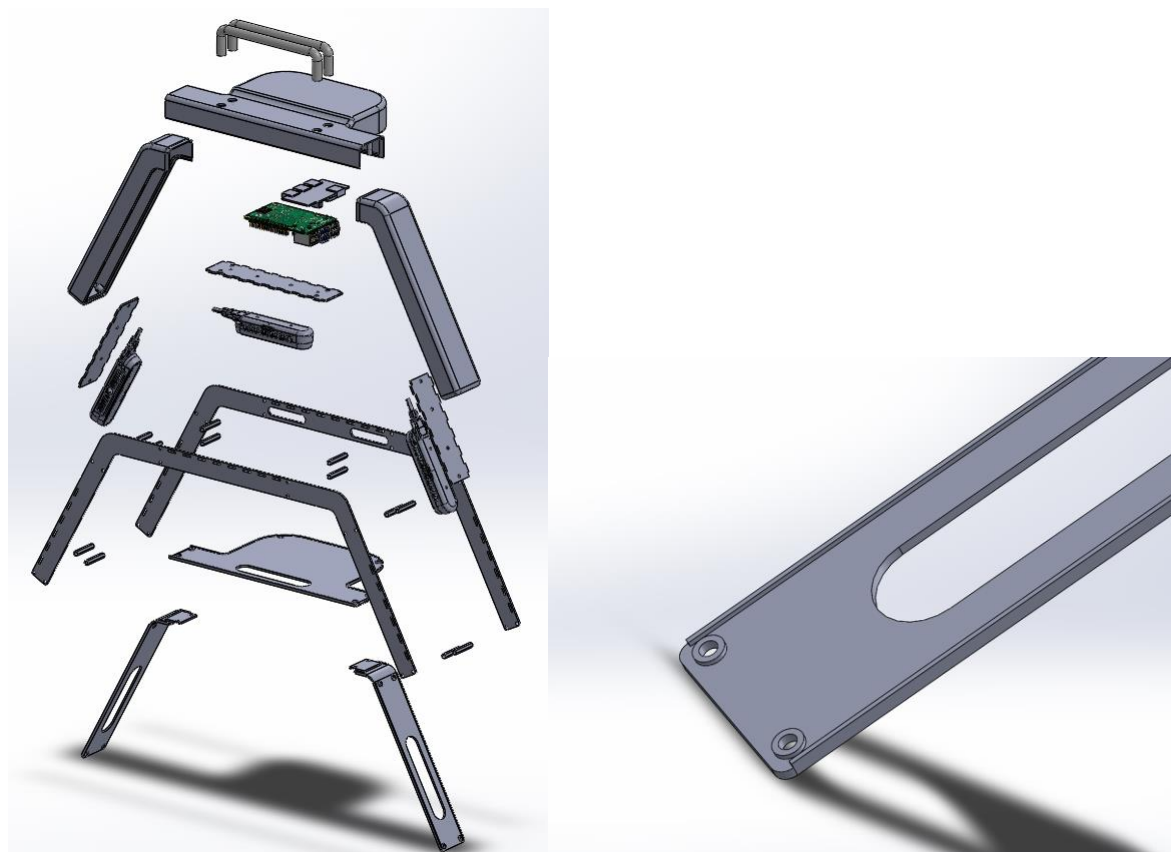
Exploded view of the CAD model next to a closeup of some hygiene measures in the design
